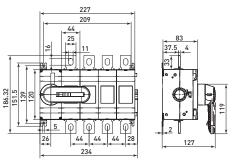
Overall and installation dimensions of 315-400 A 4P switch disconnectors
